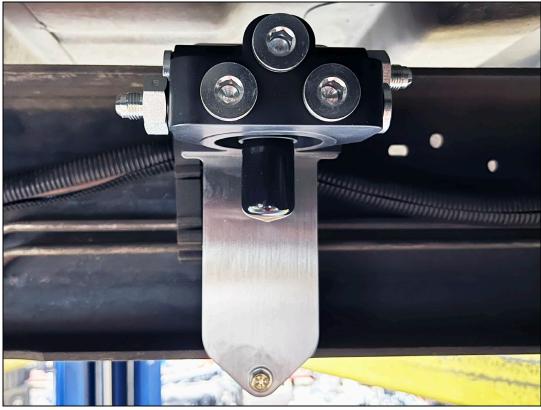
Filter Bracket Mounted Inside Frame Rail
